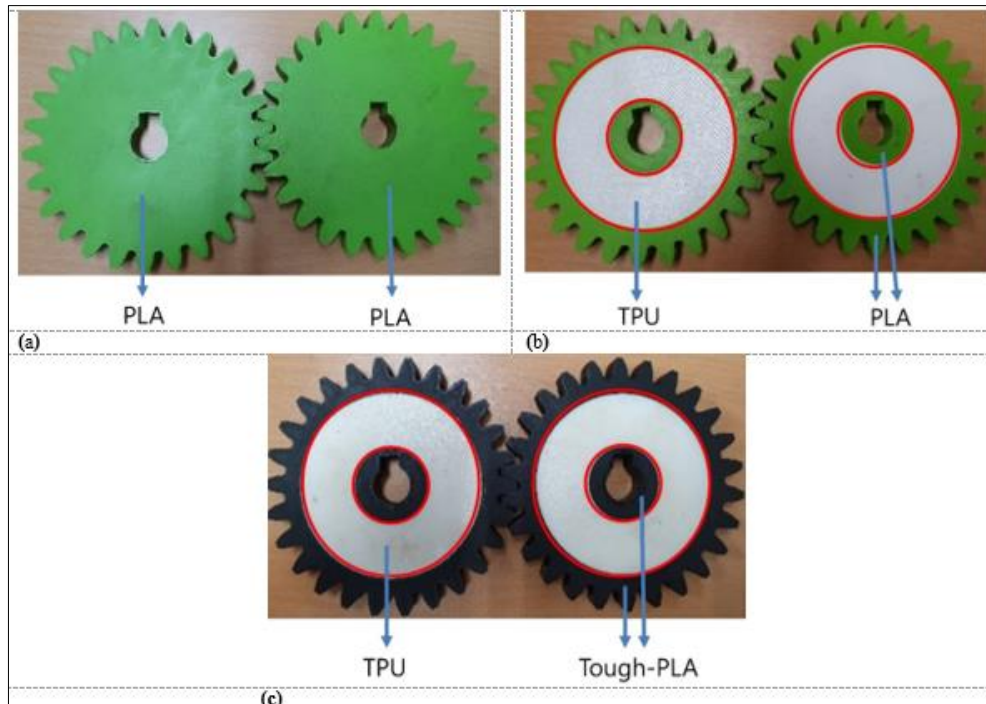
Three types of printing gear. a. PLA+PLA gears; b. PLA+TPU gears; c. Tough PLA+PLA gears
